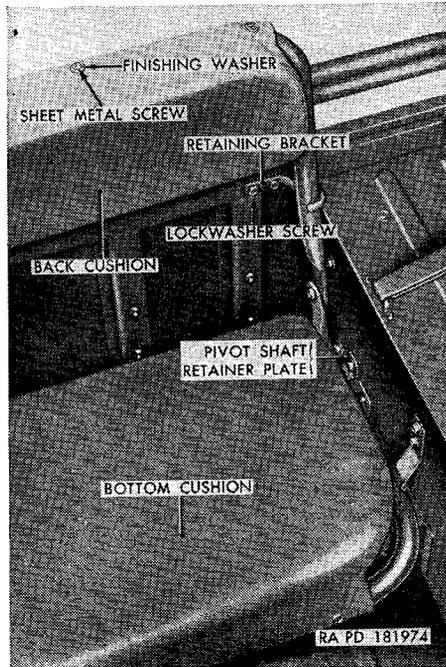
Rear seat assembly (M38A1)—installed—left side view.
